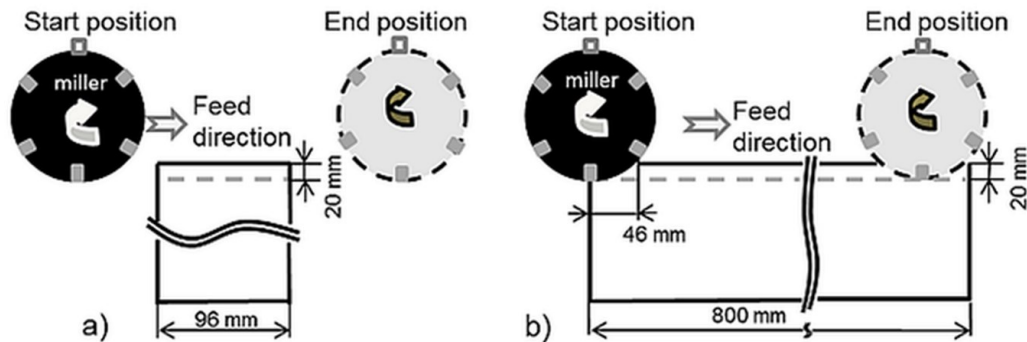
Scheme of single edged milling arrangements with different cut segment length of a) 96 mm referred to as test setup A [10] and b) 800 mm referred to as test setup B [8], [11].
